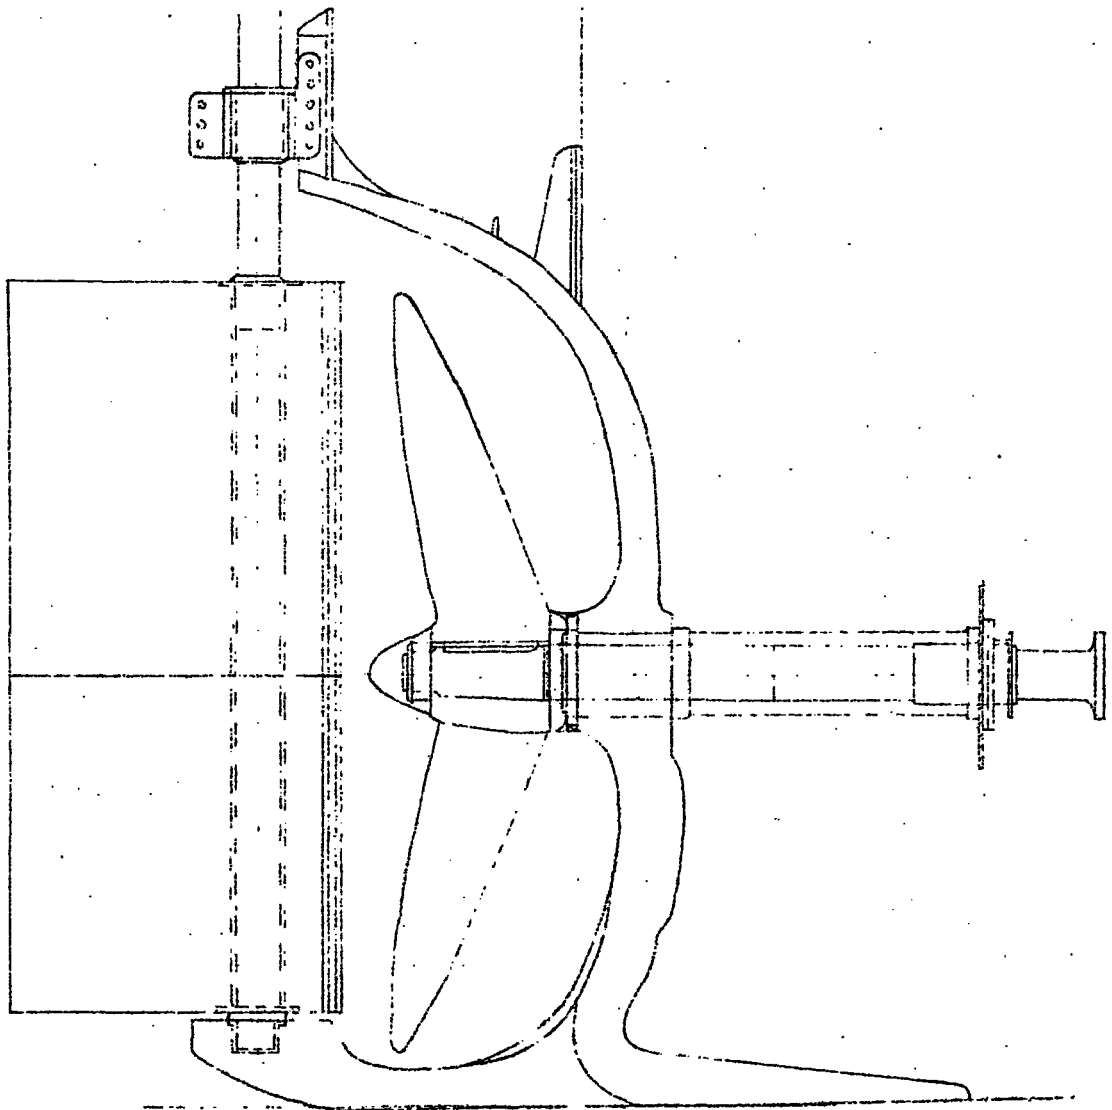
KEYED PROPELLOR ASSEMBLY OF A
